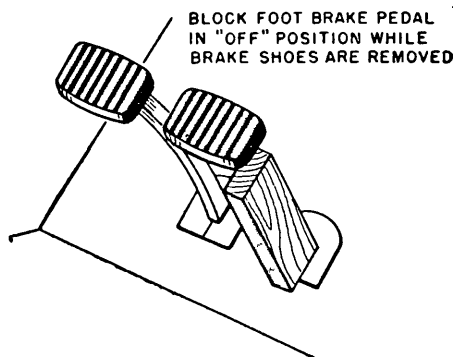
Method of blocking brake pedal to avoid loss of brake fluid while hydraulic system is open
